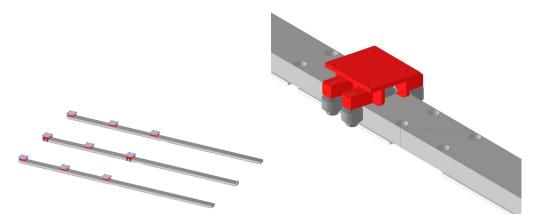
Drawing of the rails (left) and skates (right) for the moving system.
